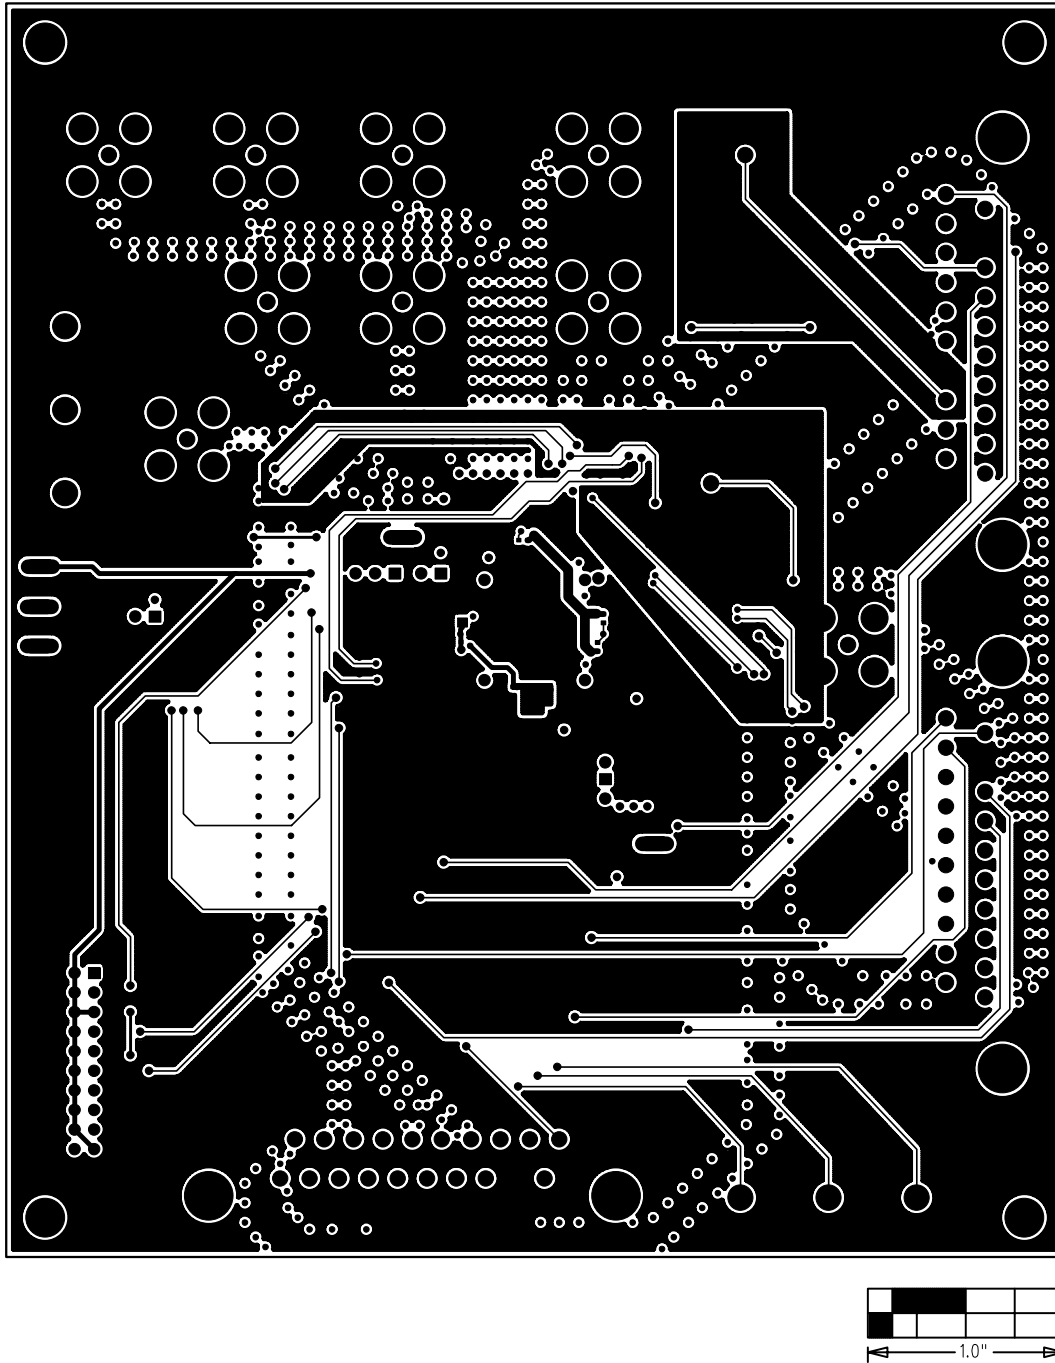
MAX4399 EV Kit PCB Layout—Solder Side
